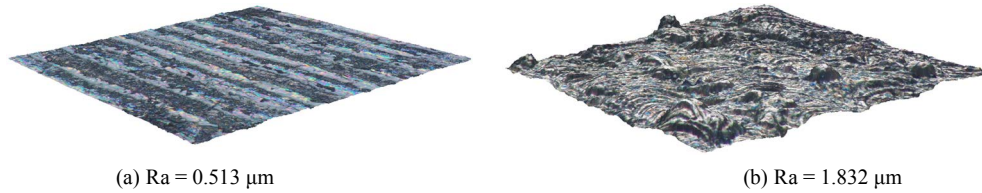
Surface topography of specimen after laser rough machining; (a) Ra = 0.513 μm , (b) Ra = 1.832 μm
